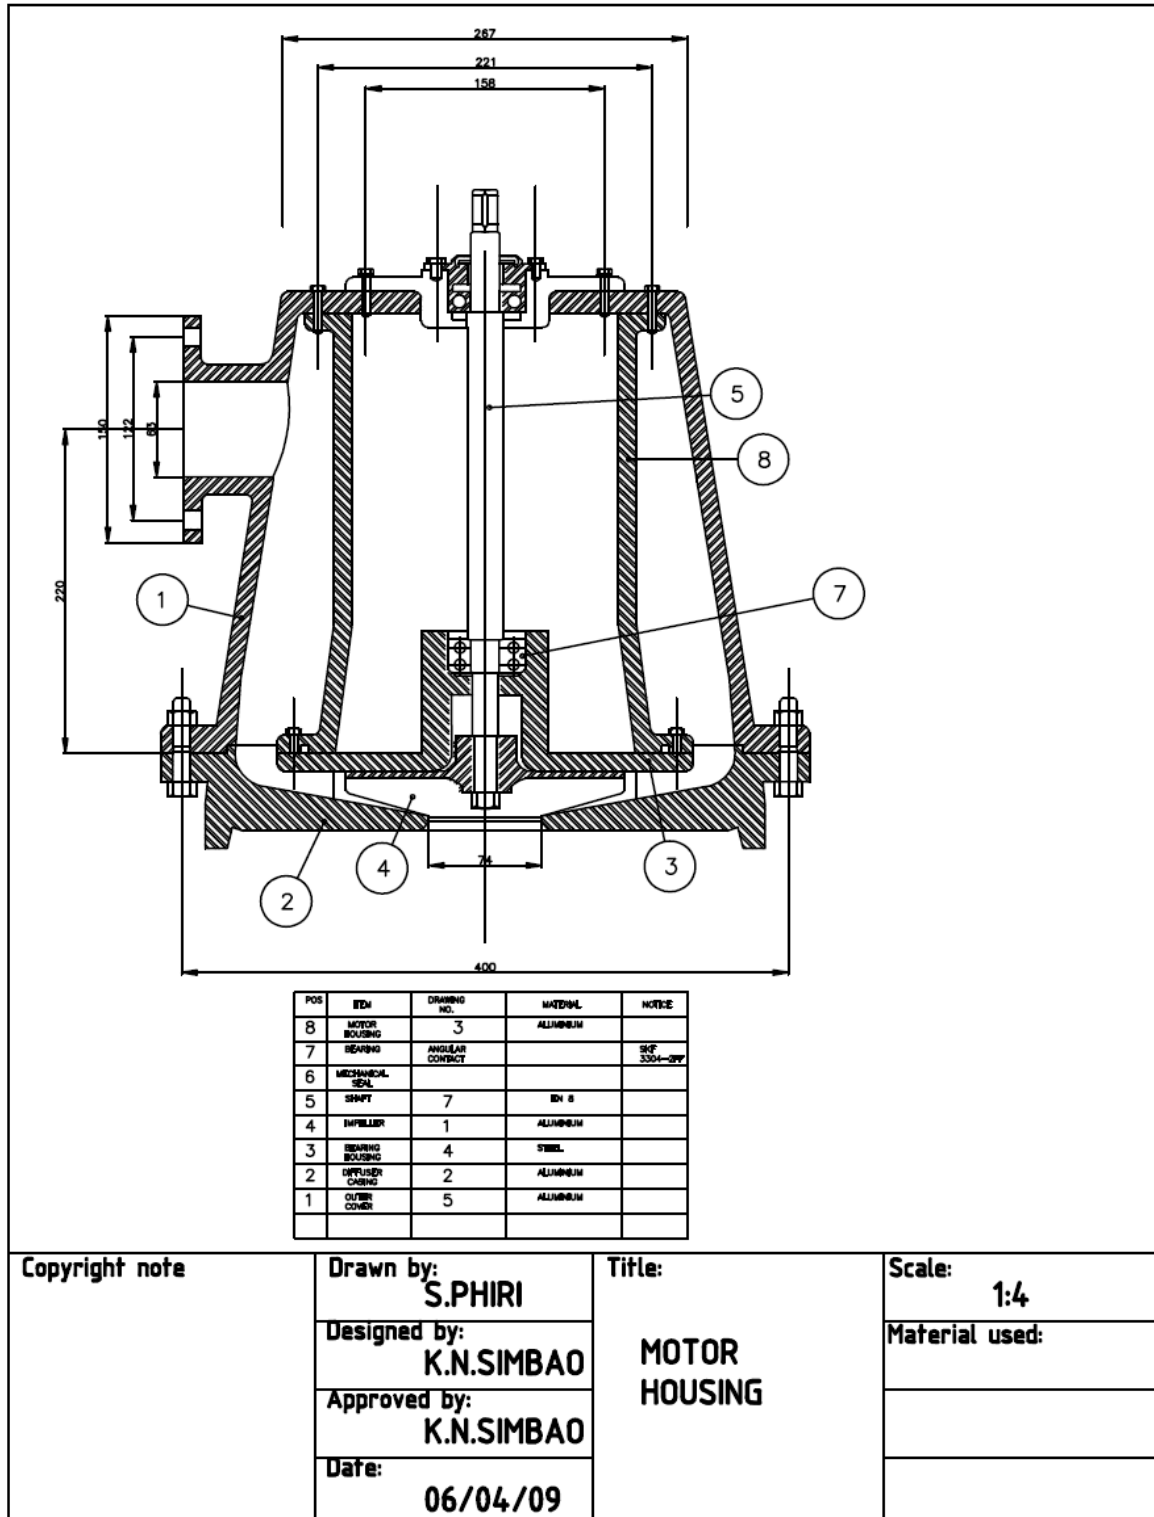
Modified Pump-Motor Casing for the New Stator Dimension Requirements
